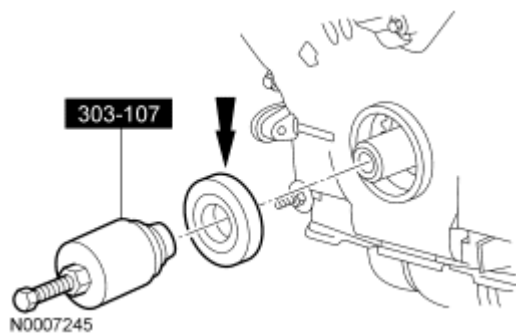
Removing Crankshaft Front Seal Using Special Tool
